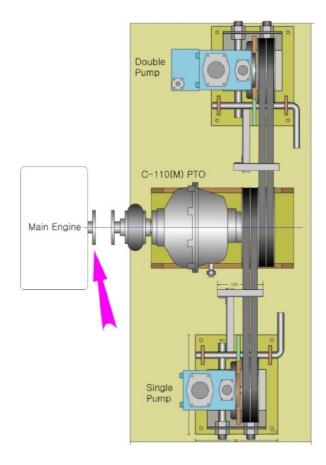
Main engine driven hydraulic pumps through PTO in Sagar Harita
